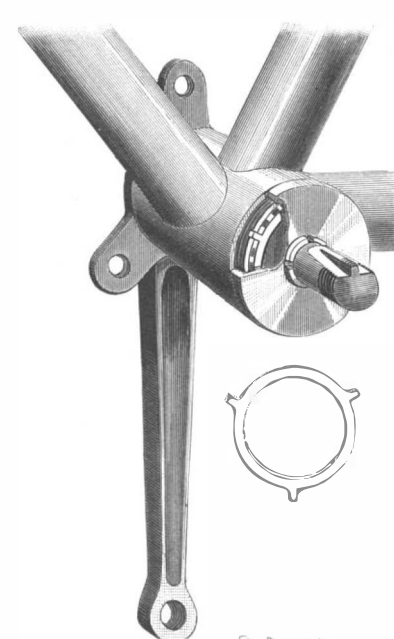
ADJUSTMENT OF CRANK HANGER BEARINGS.
